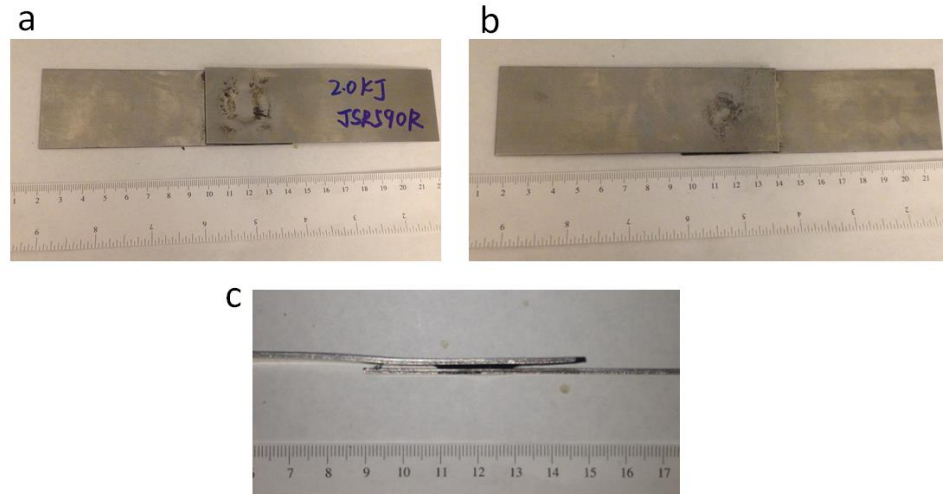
A weld of steel to steel at 2kJ by the system constructed: front view (a), rear view (b), and side view (c)
